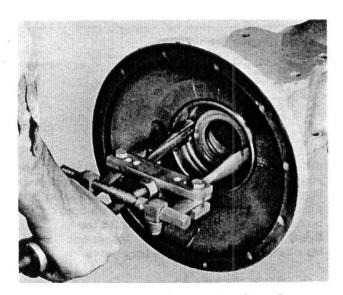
Removing Inner Axle Planetary Carrier Bearing
